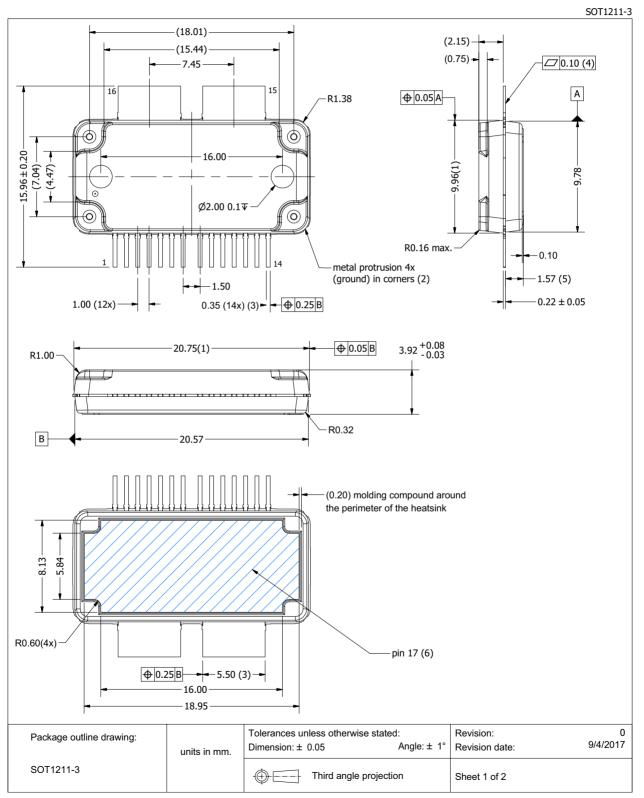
Package outline SOT1211-3 (sheet 1 of 2)
